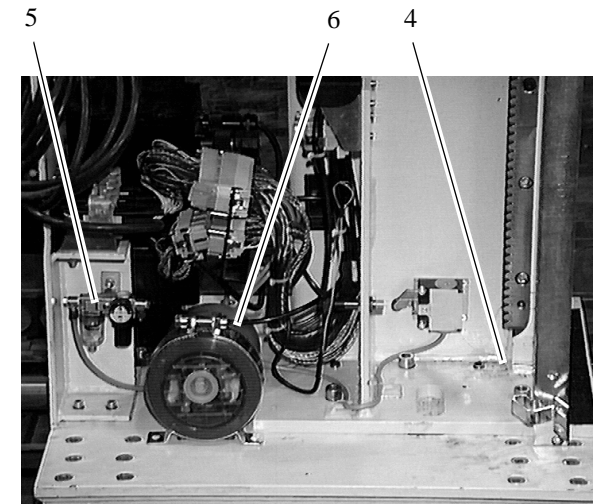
Lube Cartridge on Carriage (new systems)
